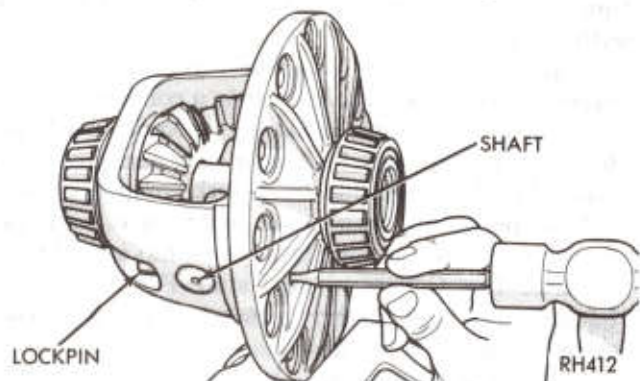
Removing Differential Pinion Shaft Lock Pin (60 and 60M Axles)
